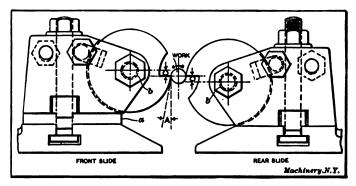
Circular Form Tools and Holders showing Location of Center of Tool in Relation to Center of Piece being formed
